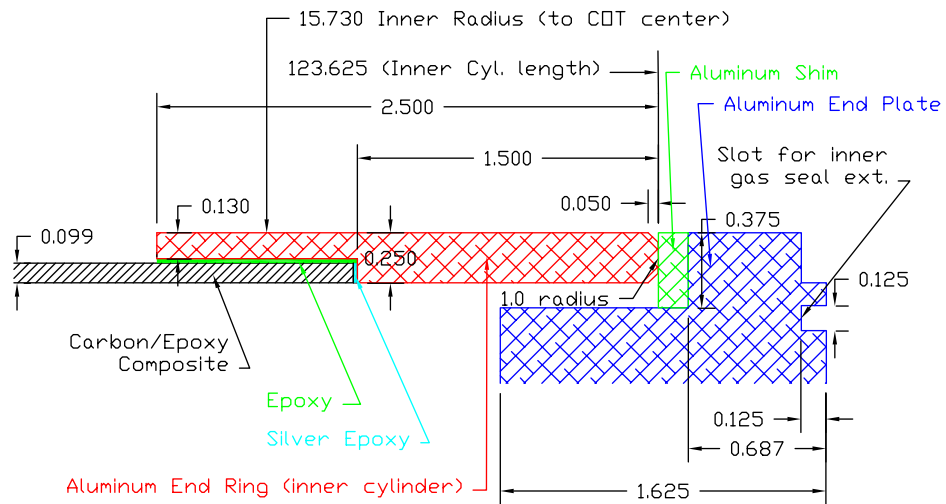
The inner cylinder at the point where it contacts the shim and end plate. Not shown is the 0.001 in. (25.4  $\mu$ m) thick aluminum sheet that is epoxied to the outer surface of the cylinder. Dimensions are in inches (2.54 cm).
